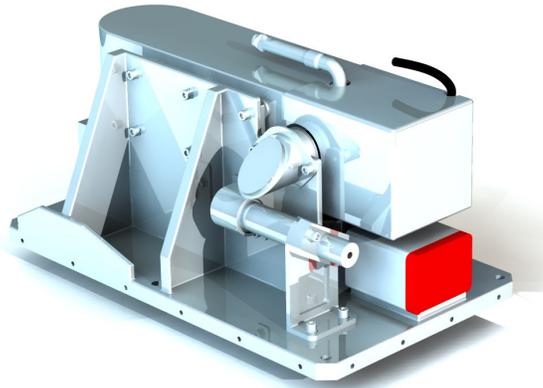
The ~ 3 liter physics package with baseplate, photomultiplier tube and vacuum tube mounting through the two layer magnetic shield. An outer magnetic shield is not shown.
